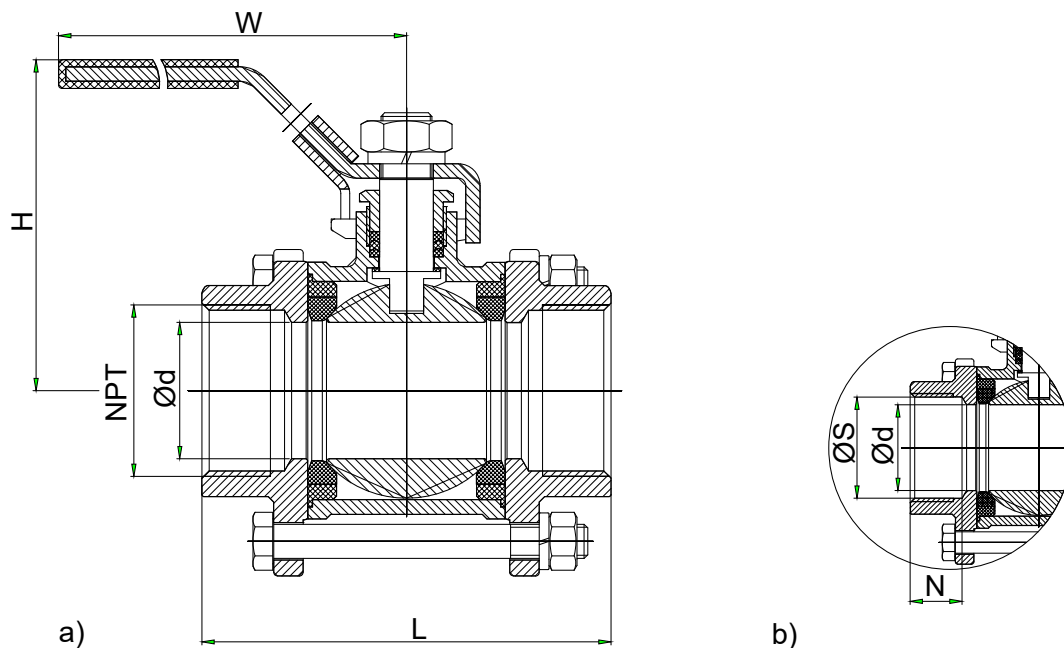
Dimensions a) Threaded ends b) Socket weld ends
